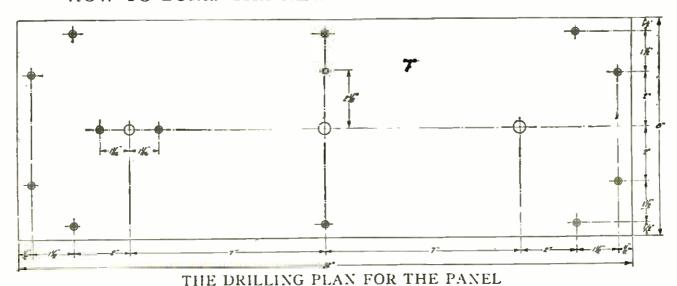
This drawing shows where to drill the holes for mounting the instruments. The correct spacings are given for the holes. The holes outlined with a double circle should be countersunk. Always start drilling holes in the panel with a small drill—one-sixteenth is a desirable size.
